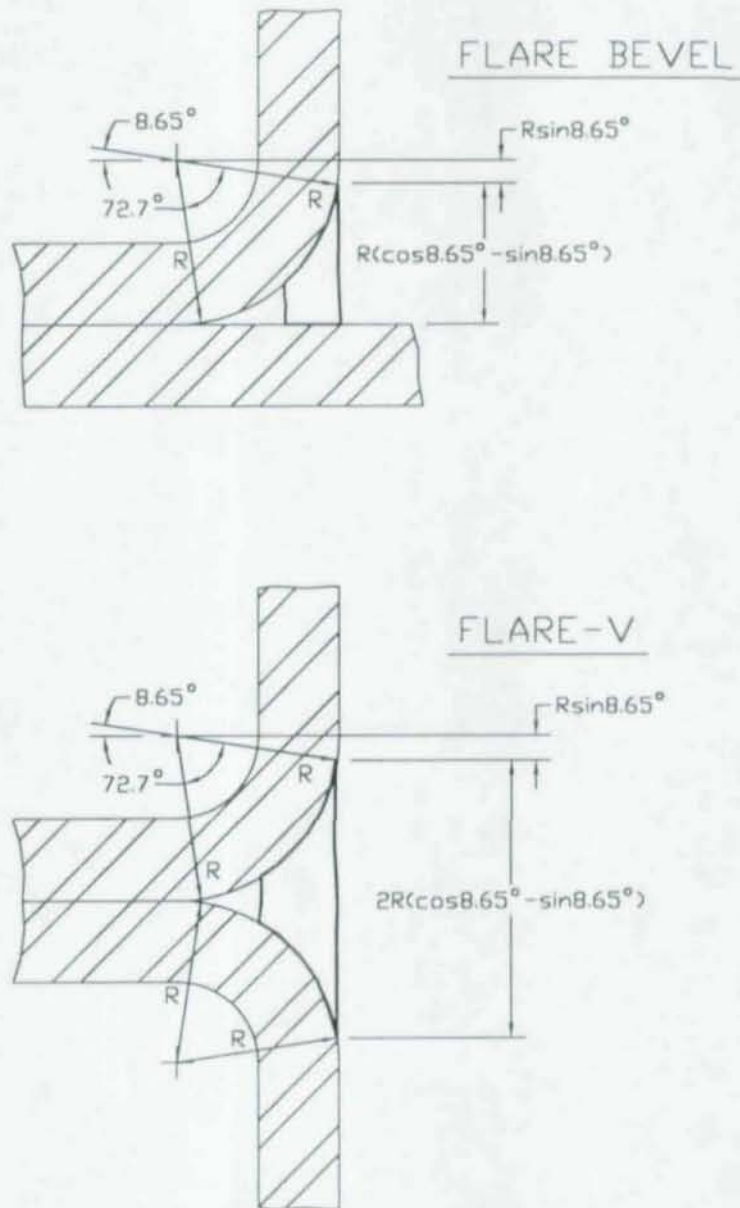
Flare Bevel and Flare-V Weld Face Related to Radius
